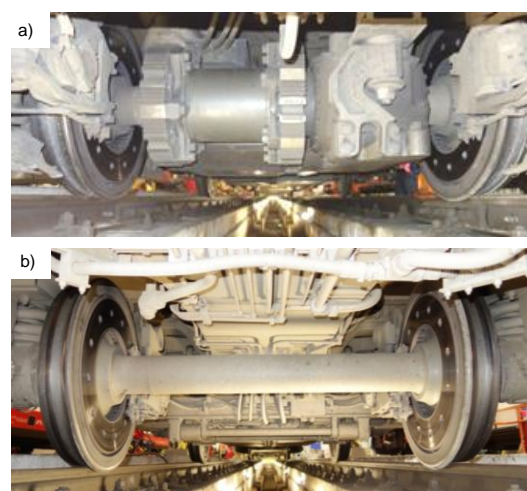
View of the wheelsets of the PESA ELF I vehicle: a) drive with visible engine, gearbox and brake discs, b) rolling with brake discs only [A.M. Rilo Cañas]
